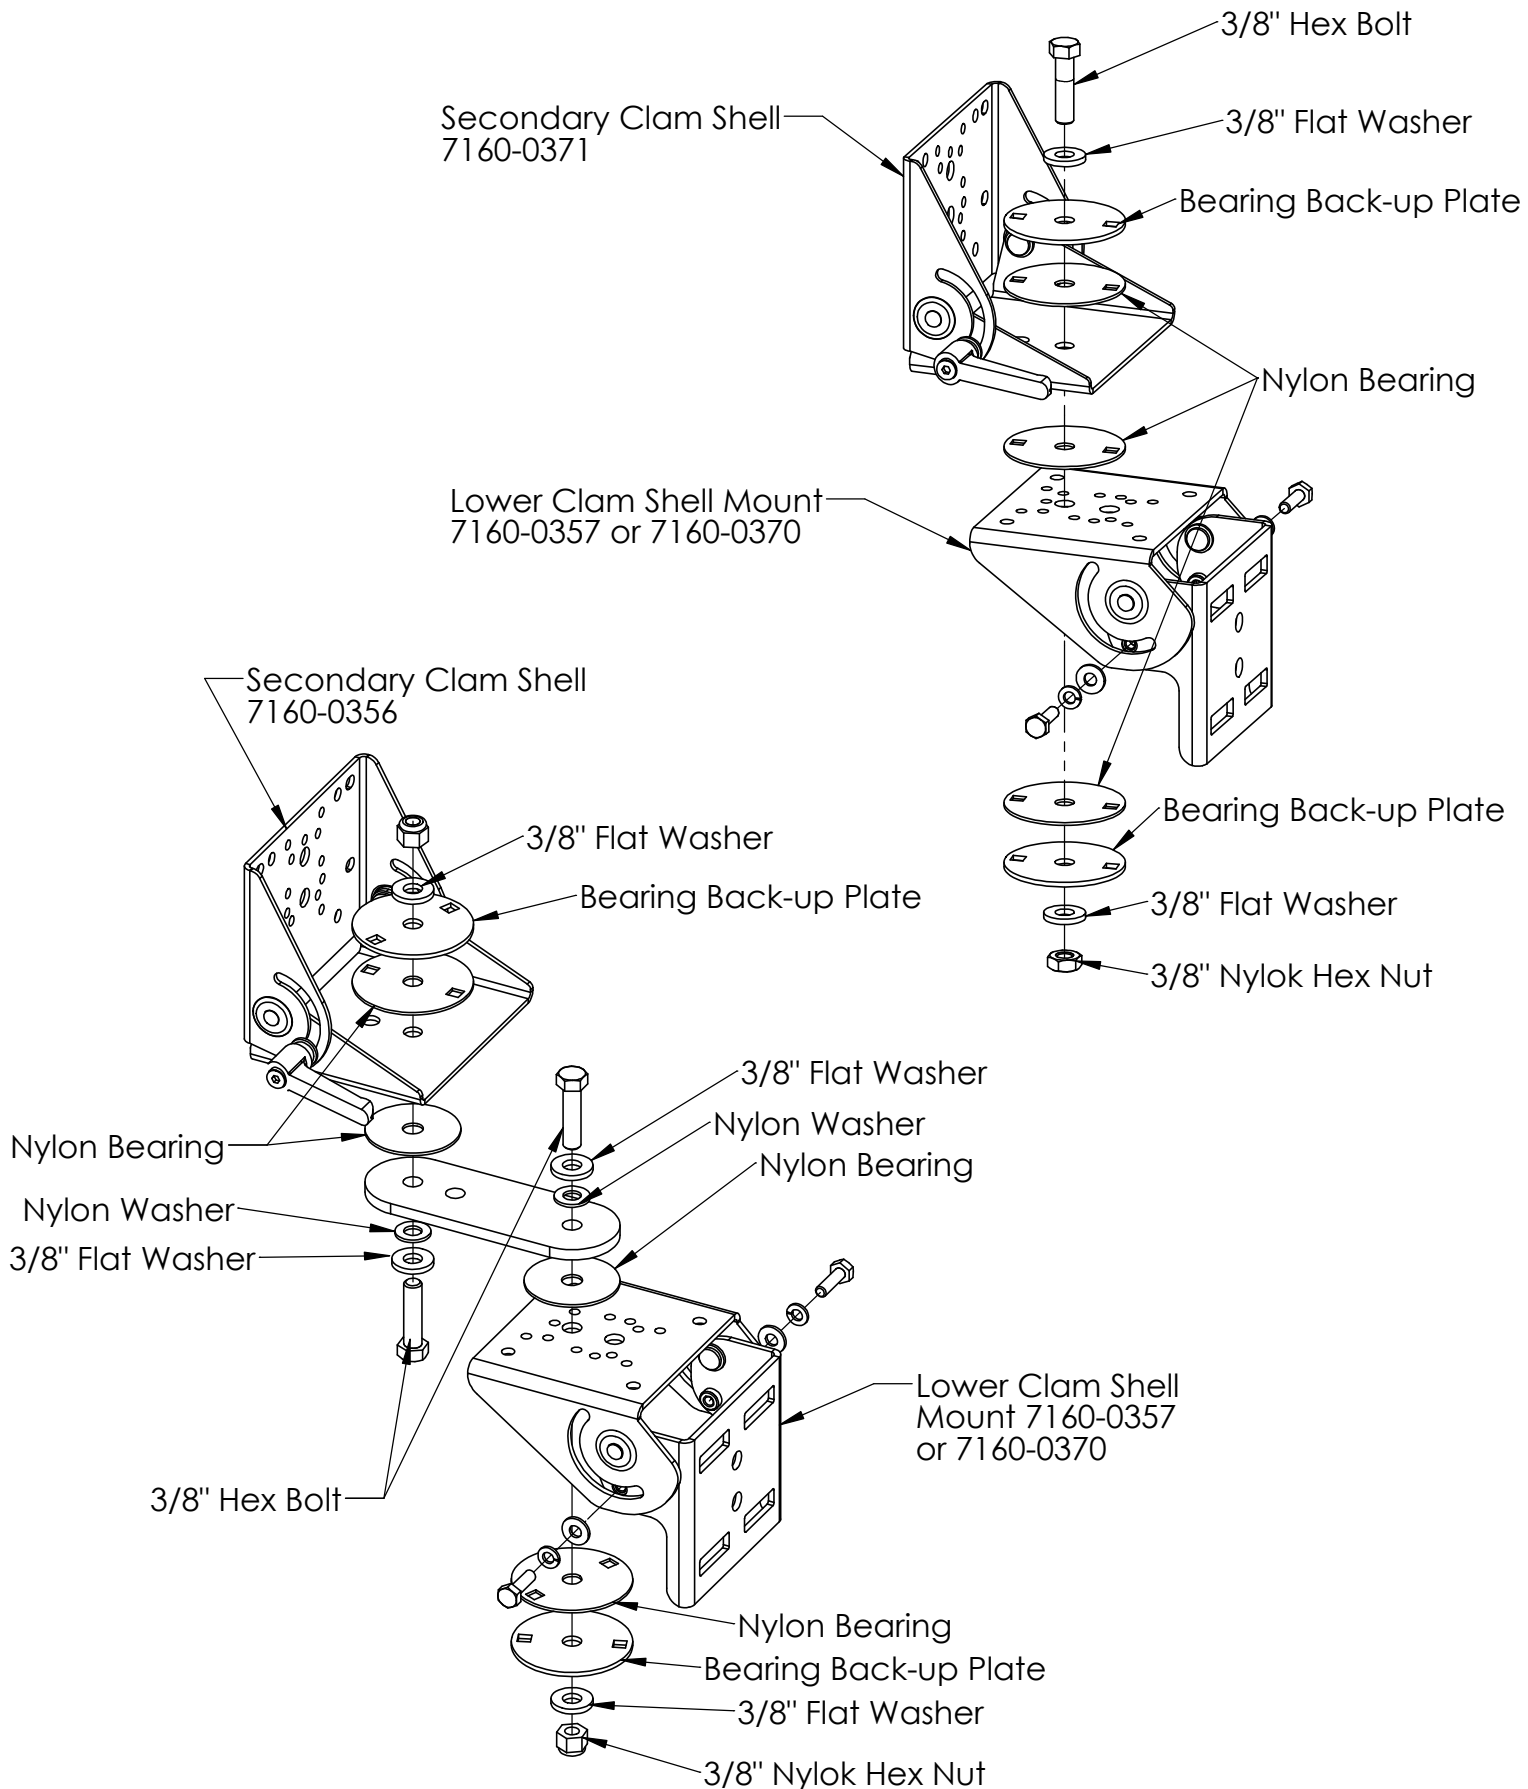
Example of Clam Shell with 4" arm and Clevis
